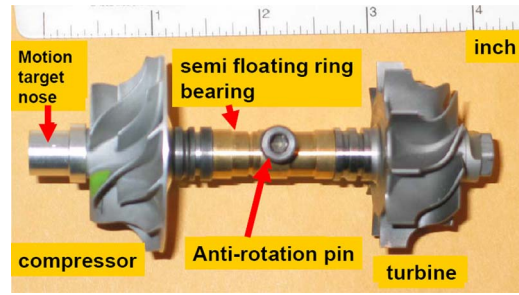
Photograph of automotive turbocharger supported on semi-floating ring bearings
